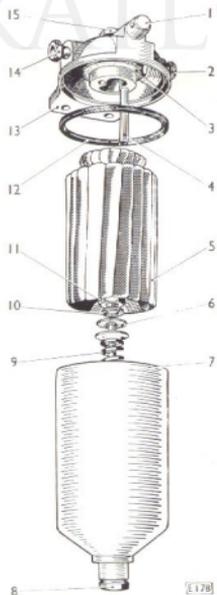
Exploded view of main fuel filter (C.A.V. cloth element type).
